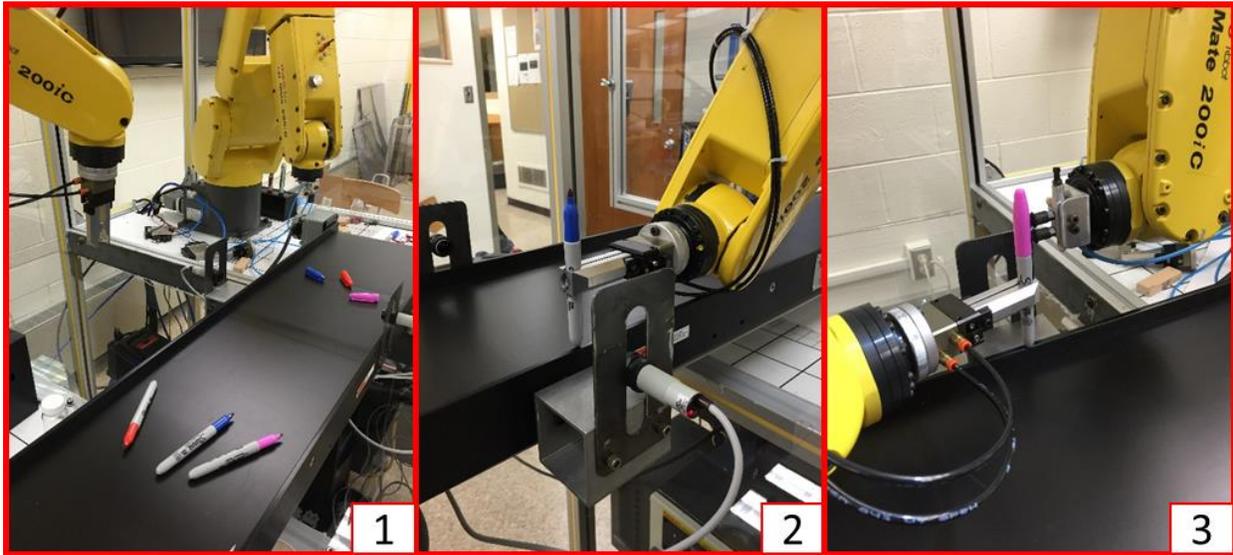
1) Initial setup with open markers and caps 2) Robot 2 picks the open marker and places it for assembly 3) Robot 3 assembles the cap on the marker
